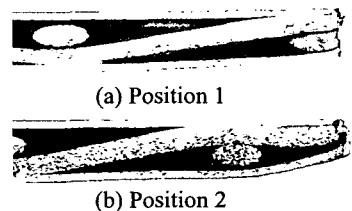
Sheared surface of resistance-welded ISB sheet metal (WM)
